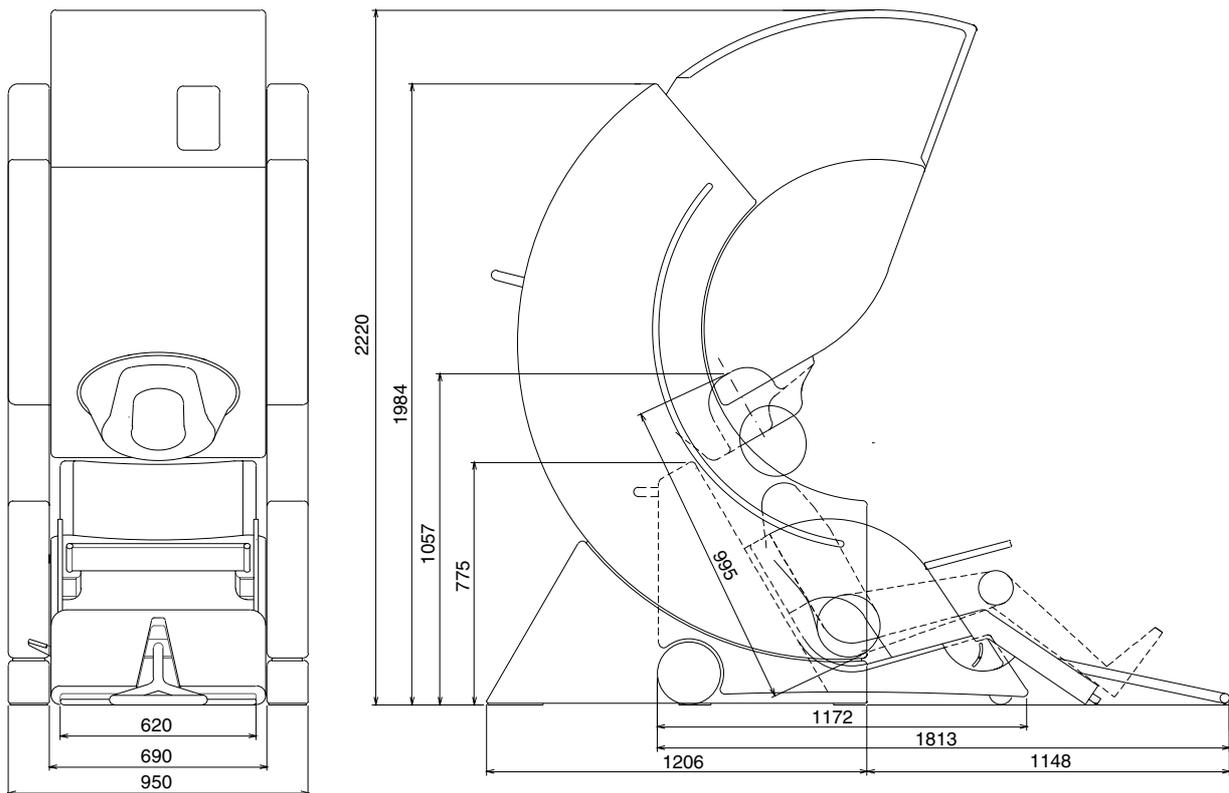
Gantry in upright measurement position. Dimensions in millimeters.
